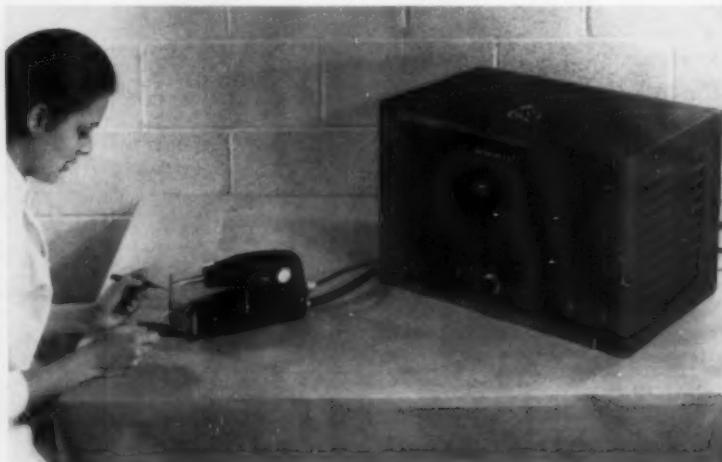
Ultrasonic Welding Is Valuable for Joining Dissimilar Metals. Here, very fine aluminum wire is being welded to germanium. (Courtesy Aeroprojects, Inc.)
